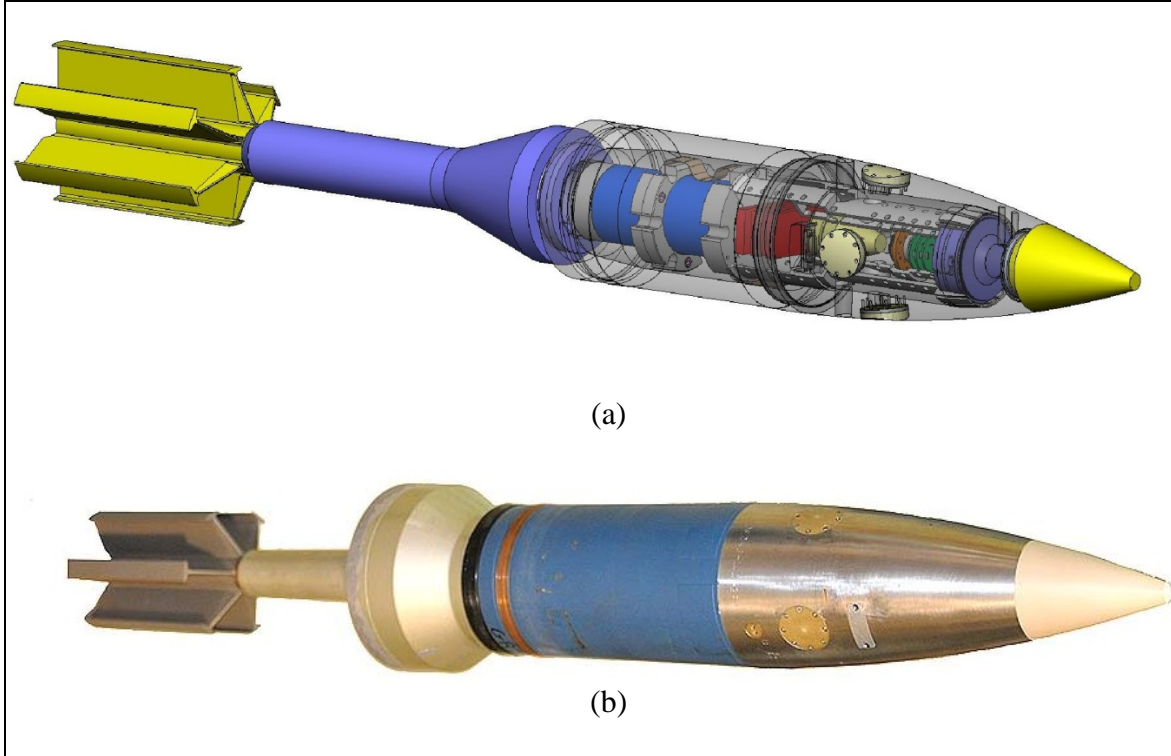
Modified M831 high-G carrier (a) CAD model (b) actual hardware.
